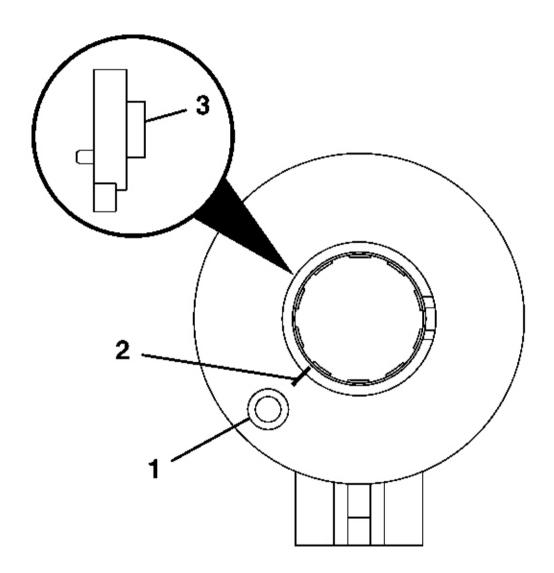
Steering Wheel Position Sensor Alignment Mark & Proceed To Step 13 Courtesy of GENERAL MOTORS CORP.
